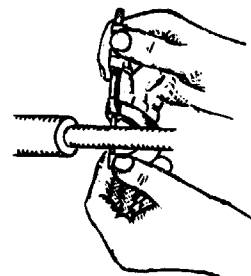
MEASURING WORK MOUNTED IN A MACHINE
